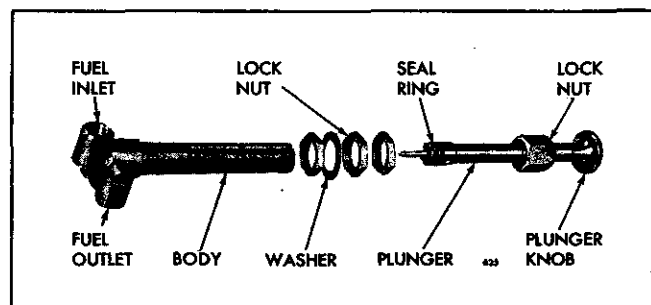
Fuel System Priming Pump and Relative Location of Parts
